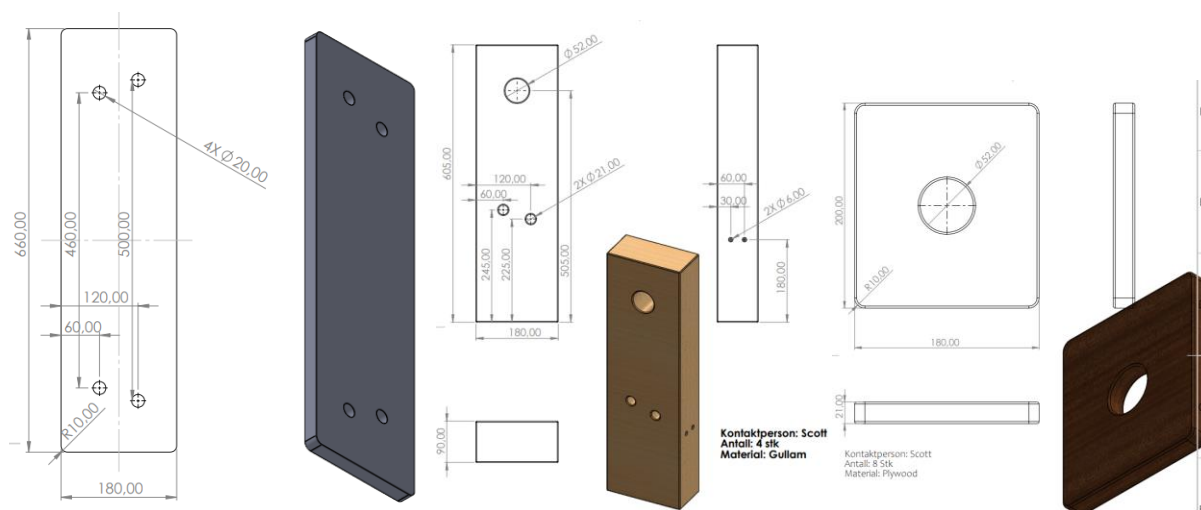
4 – Detailed drawings of the middle plywood plates, Glulam pieces and end plywood plates.
